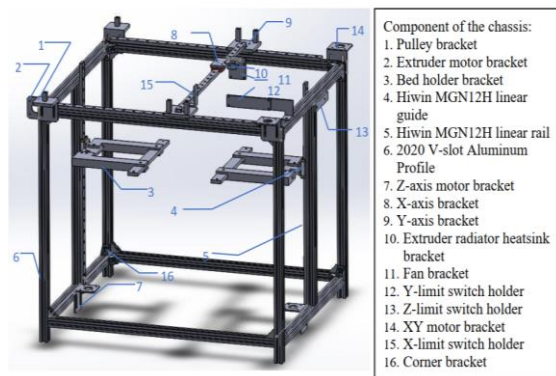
The 3D drawing of the chassis (dimensions are in mm).
